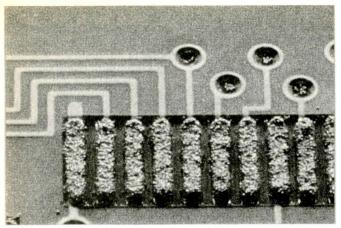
Solder paste in place: the photograph clearly shows its grainy texture.
